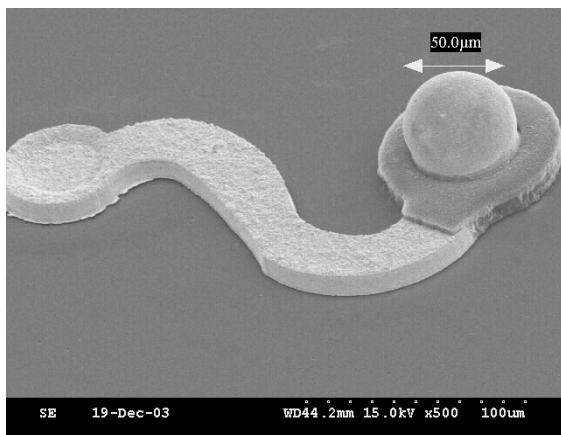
SEM photograph of a reflowed solder bump on a electroplated metal lead which is protected by a photodefined polymer dam. (The diameter of the solder ball is 50µm)
